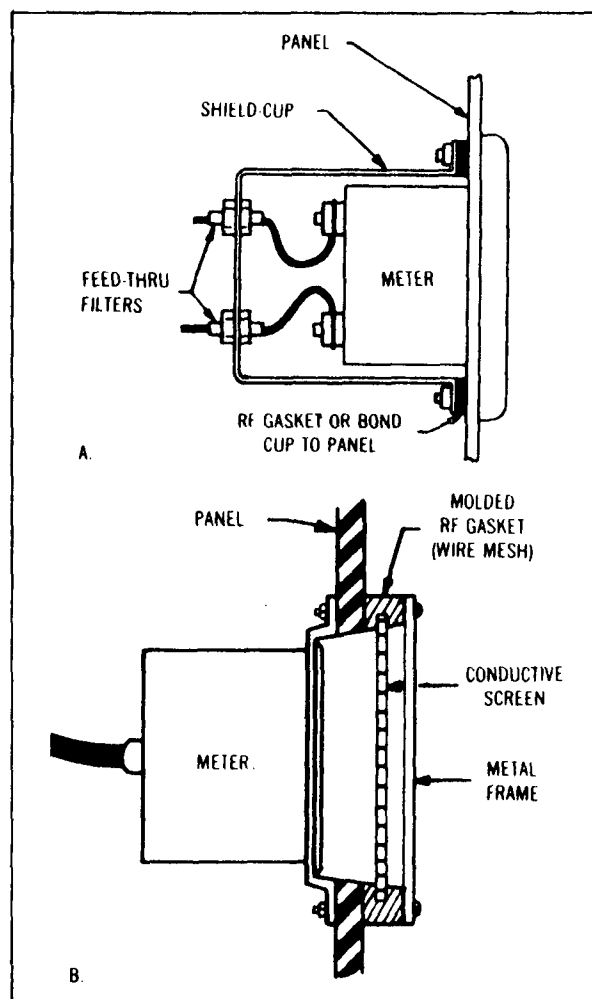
Method of Mounting Wire Screen Over a Large Aperture
